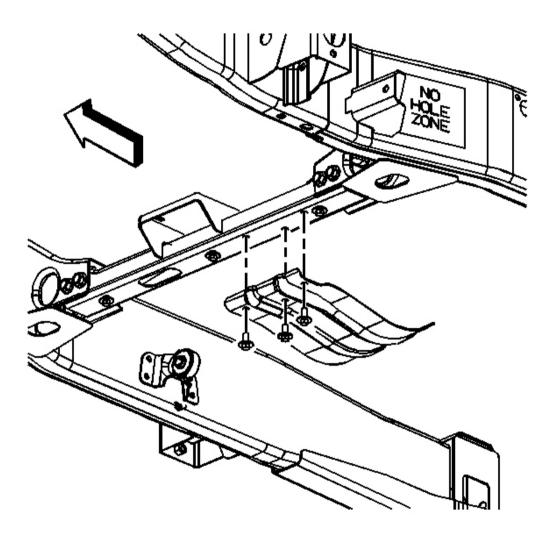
Transfer Case Shield Courtesy of GENERAL MOTORS CORP.
